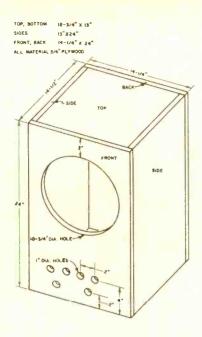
Basic dimensions and assembly of cabinet. Front loading panel is 14 $^{1/4}$ " by 16 $^{1/2}$ ".
